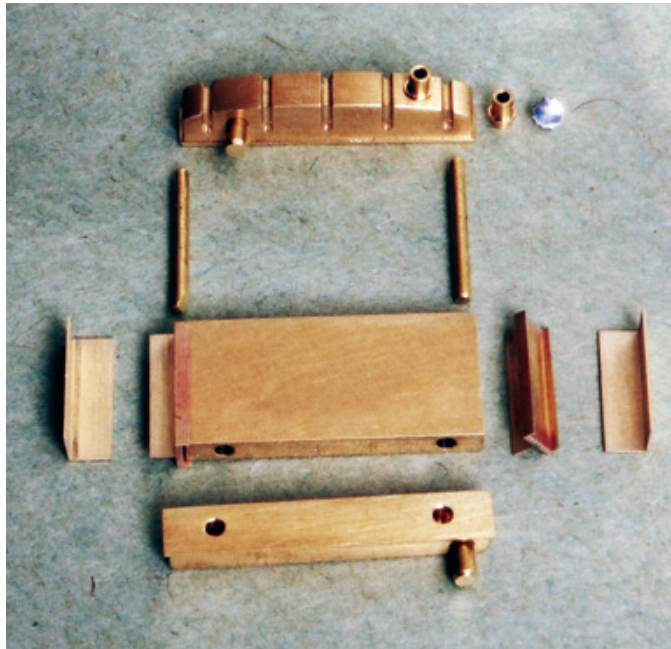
The multi-piece radiator assembles easily and the same way every time. The blank center section is used only to determine the overall size of the assembly for creating and checking the overall fit of this assembly to the body and other mechanical components; the center section will be replaced with a properly-detailed radiator at a later time.
